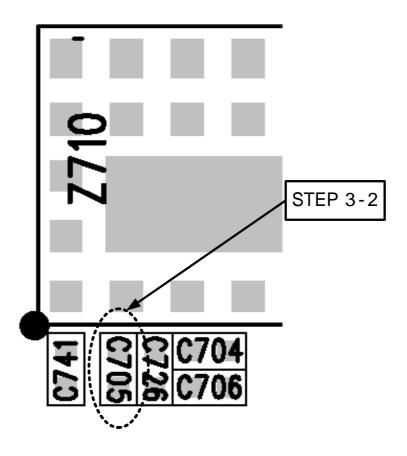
PAM TXONPA and PCSSEL Test Point on the PCB Layout
